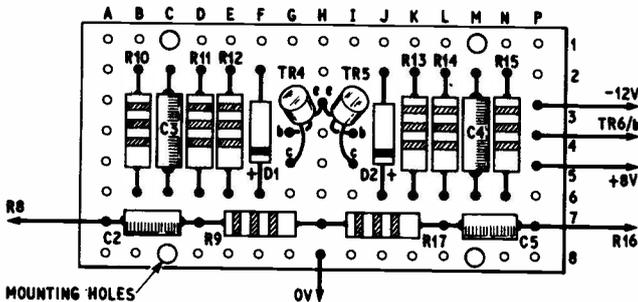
Component layout and underside wiring of Board 2 (flip-flop) later fitted in the synchroniser box
